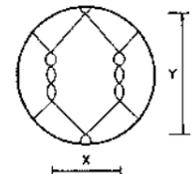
WIRE MESH DIMENSIONAL LAYOUT
